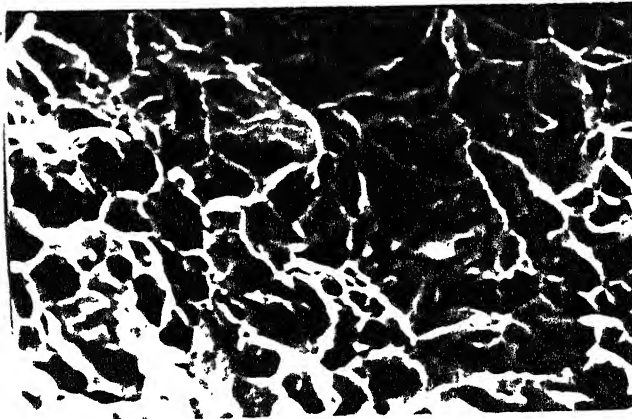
SEM view of fractured surface after the tensile test on strip hot rolled at 1223K and annealed at 823K. (x3000)
